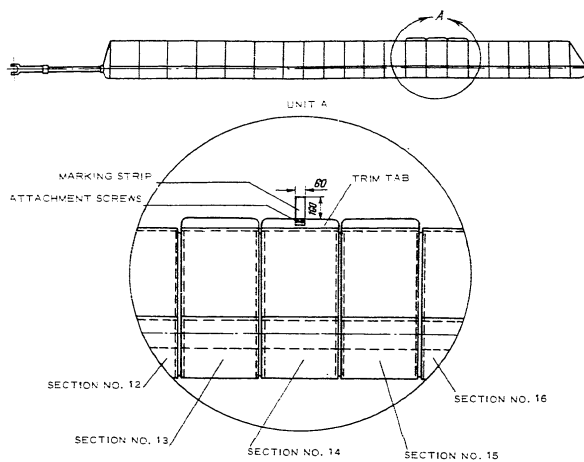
POSITIONING MARKING STRIP ON BLADE No. 1.
